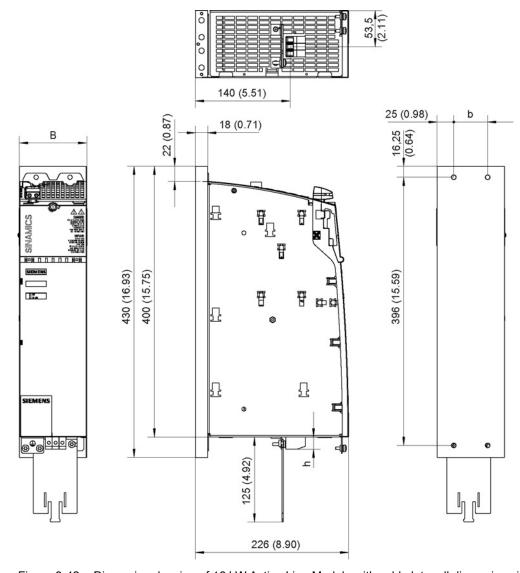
Dimension drawing of 16 kW Active Line Module with cold plate, all dimensions in mm and (inches)
